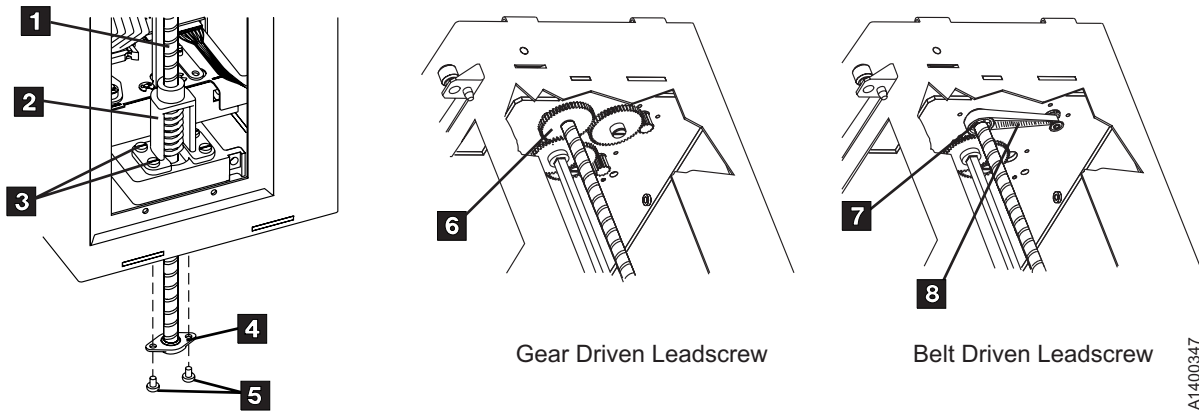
Gear-driven and Belt-driven Leadscrew Assembly
